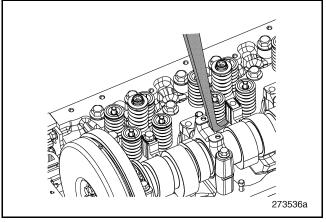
Removing Injector with a Pry Bar (Tool No. 9998511)
